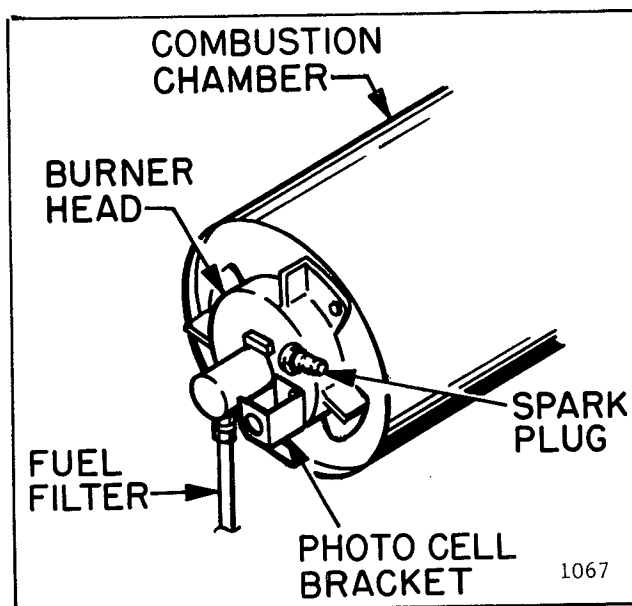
Burner Head, Spark Plug, and Fuel Filter
